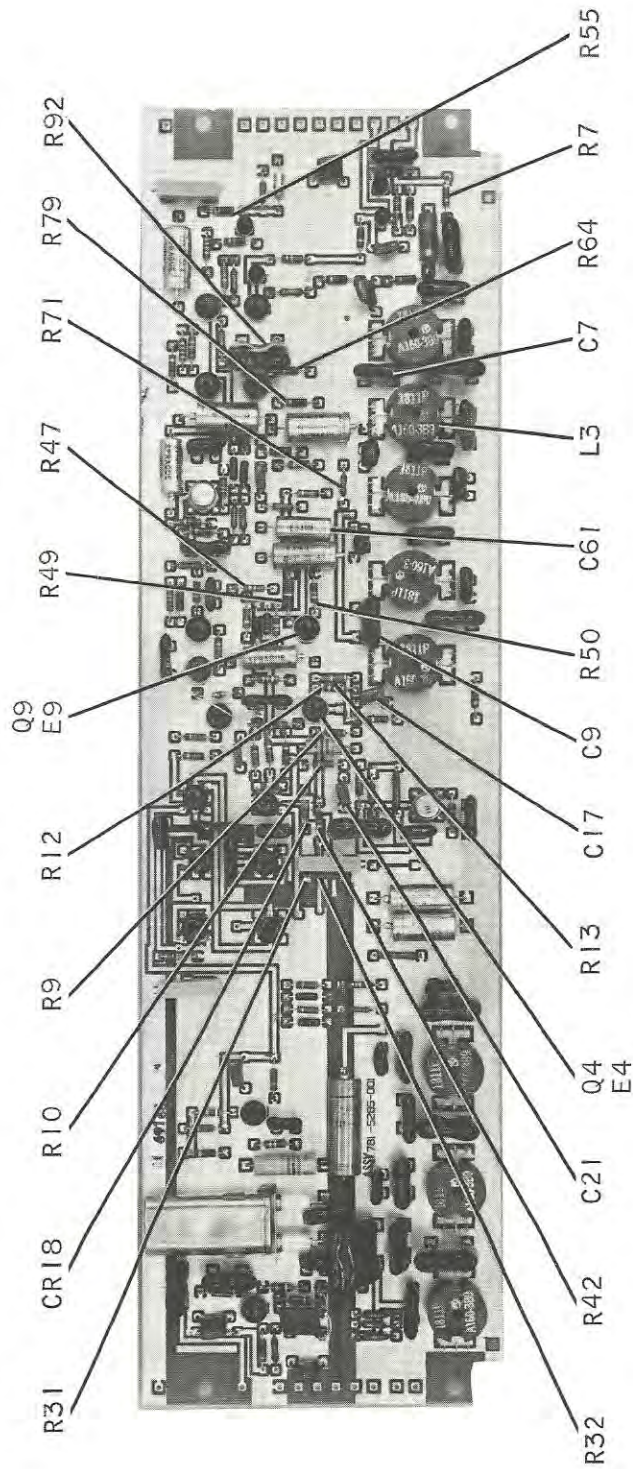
Printed Circuit Board (Sheet 4 of 5).
